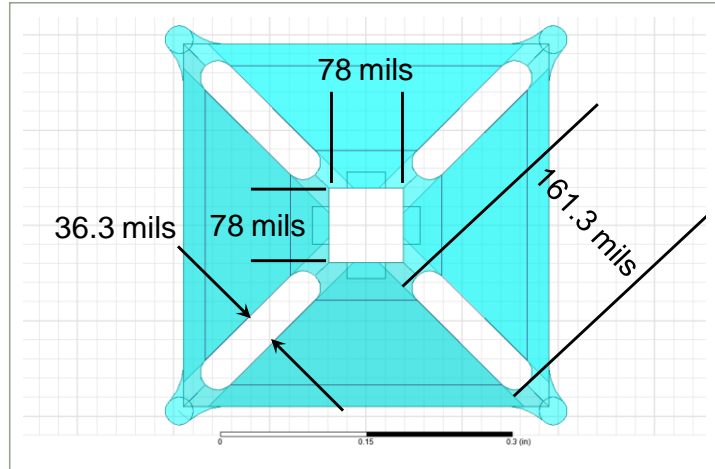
X-Band droopy bowtie subassembly: top view, unplated. Dimensions of openings in mold
